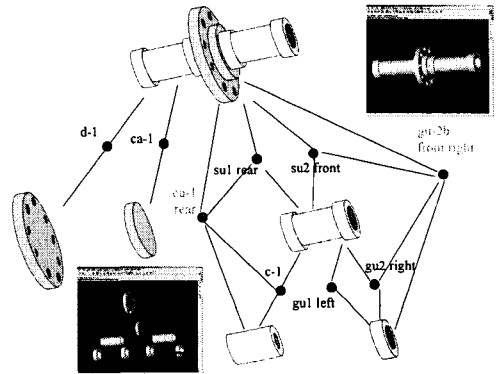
Hub assembly example for CPC Adaptor⁽¹³⁾
